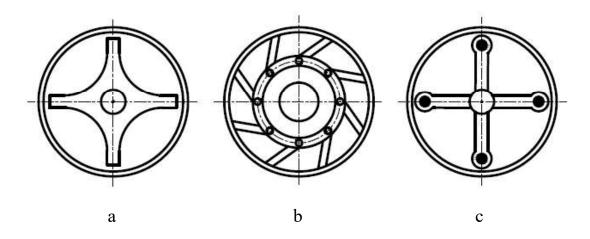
Rotary mixers: a – rigid fastening, b – with joint fixing, c - with movable blades
